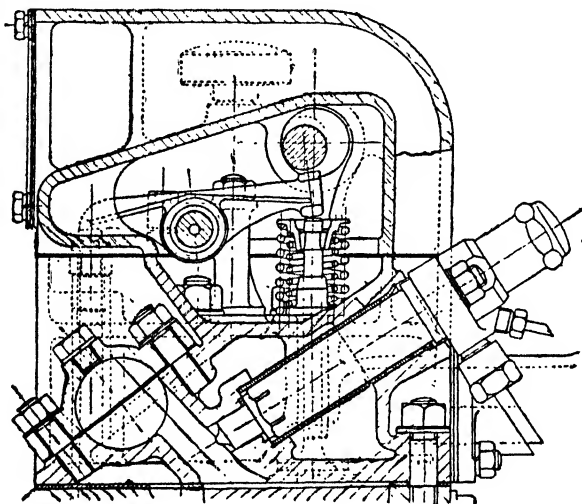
The "Aeroflow" Combustion Head used in the Perkins Engine.
